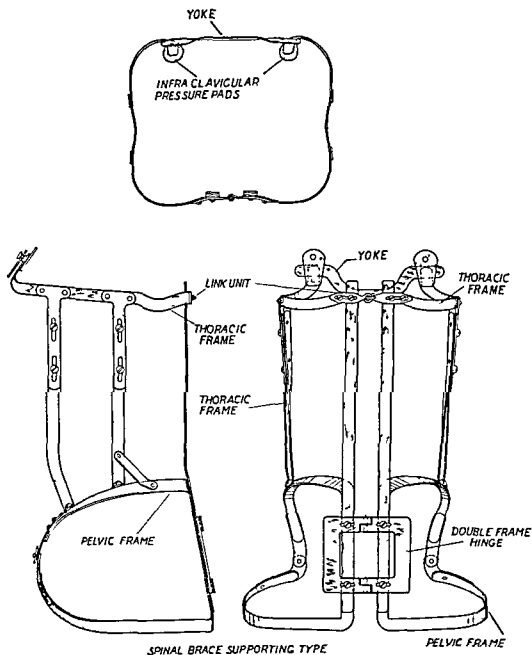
Working drawing for the steel skeleton of a passive supporting spinal brace
